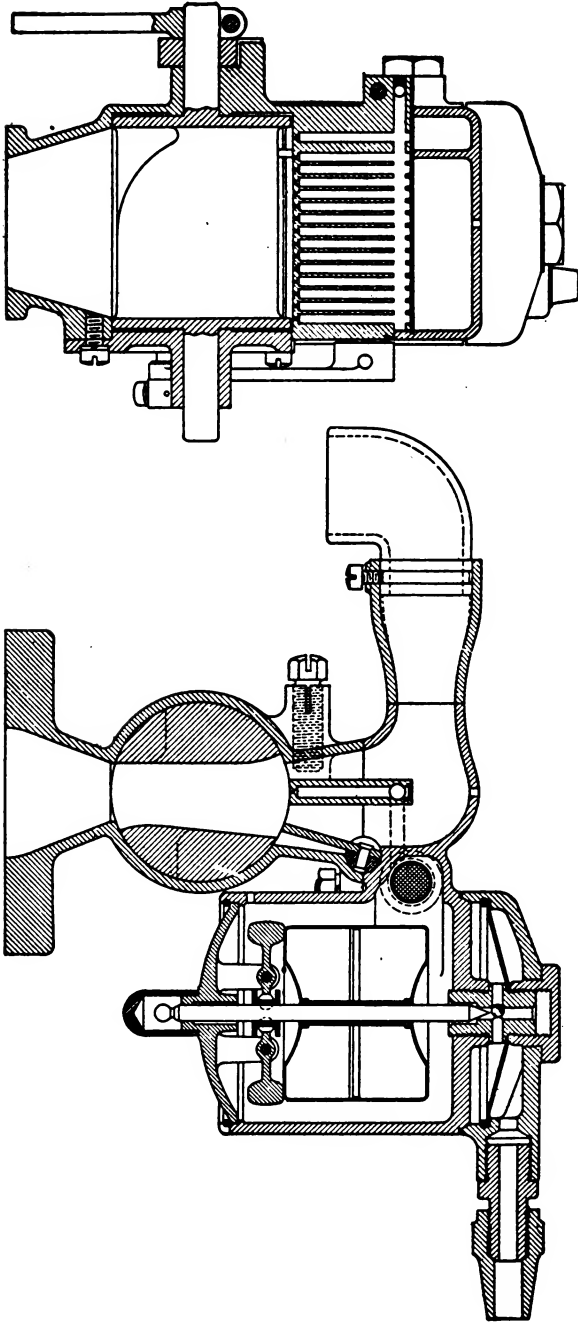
Section through the Master Carburetor, Which Is a Multiple-Nozzle Form and Handles Heavy Fuels Well
